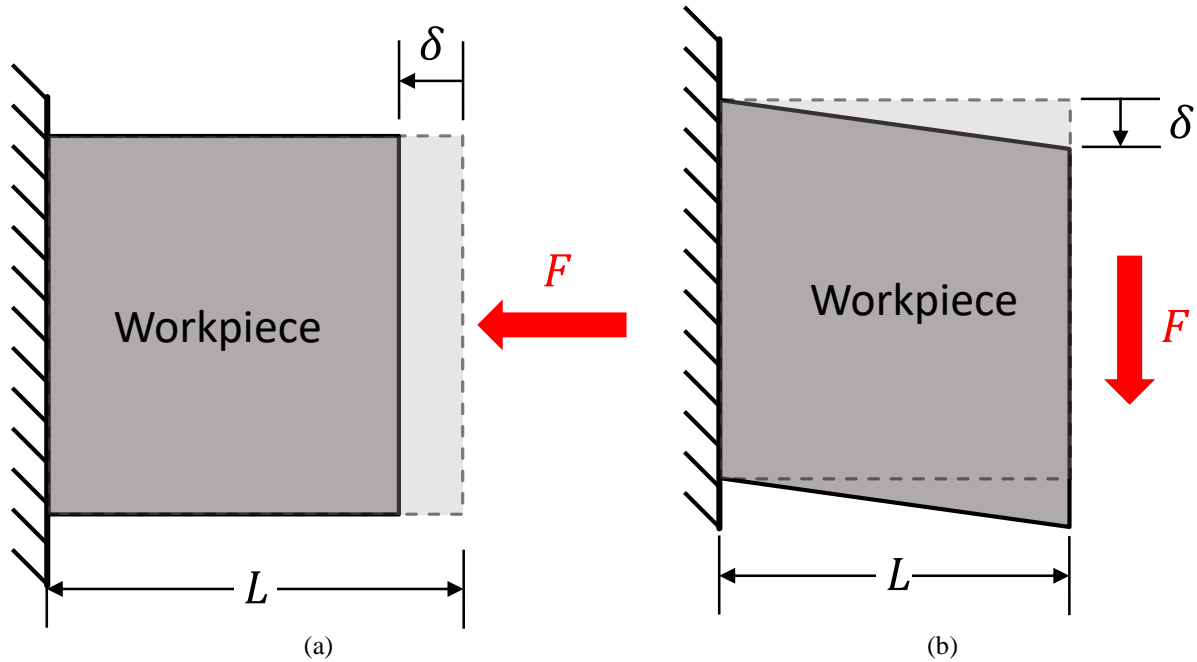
(a) Bulk workpiece tension/compression model, (b) bulk workpiece shear model
